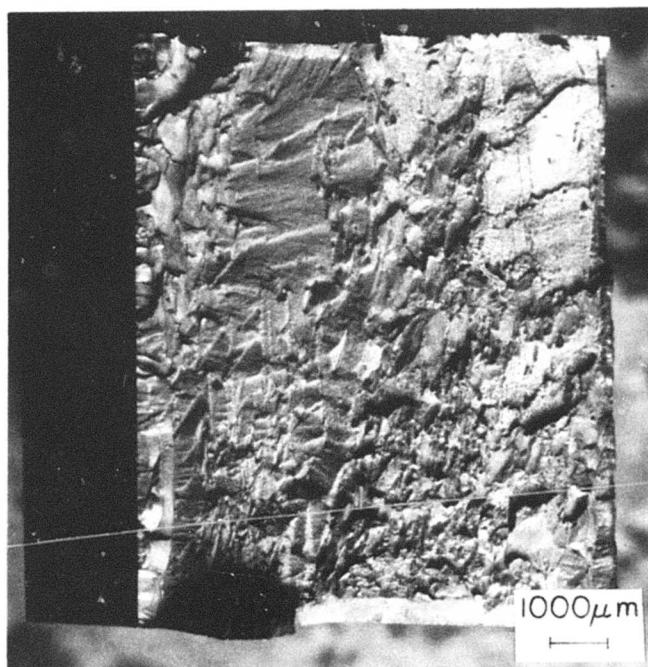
Alloy 227, sample 7ESR3. Fracture surface X8, crack path X500.
